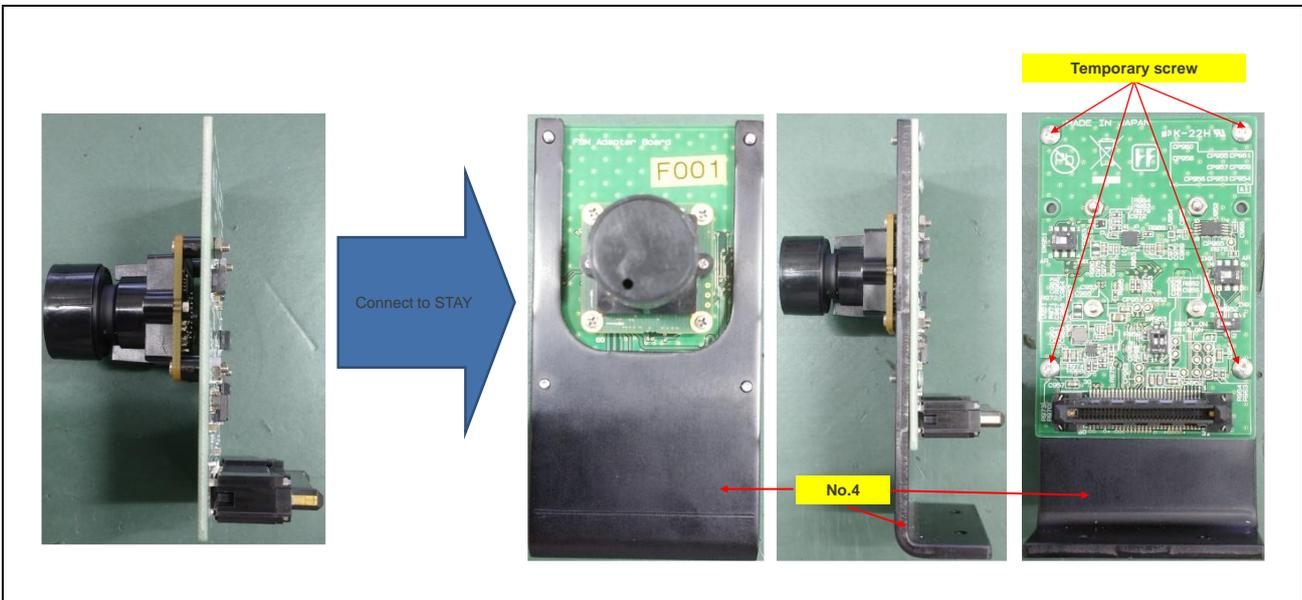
Connect FSM Adapter Board to Stay (FSM-AR1335)
